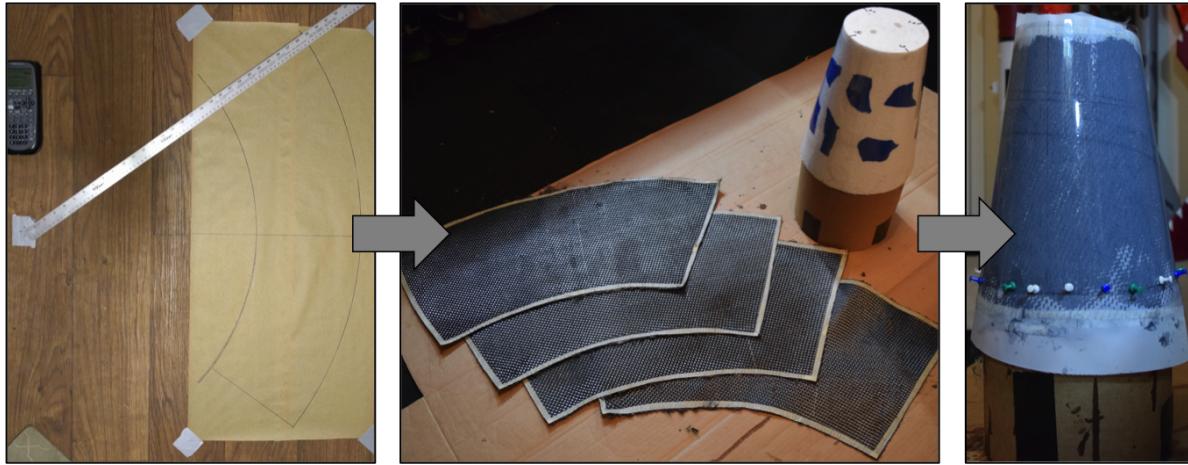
Tail cone manufacturing process, Transition template - wet layup on positive mold - mylar film compression
